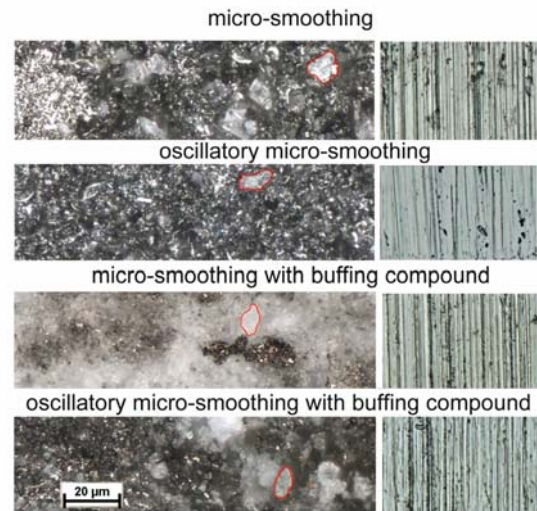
Image of abrasive paper and machined surface (finishing time – 2.5 min) taken by Nikon Eclipse MA200
